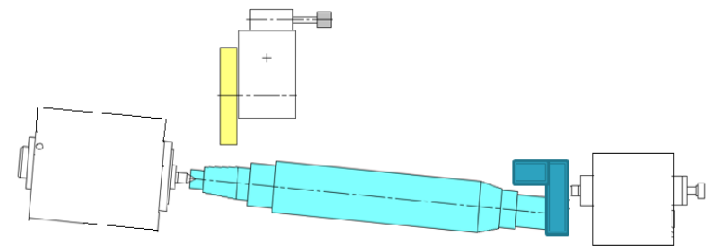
; 25kw shaft hold between head stoke and fixture supported at tail stoke (top view)
